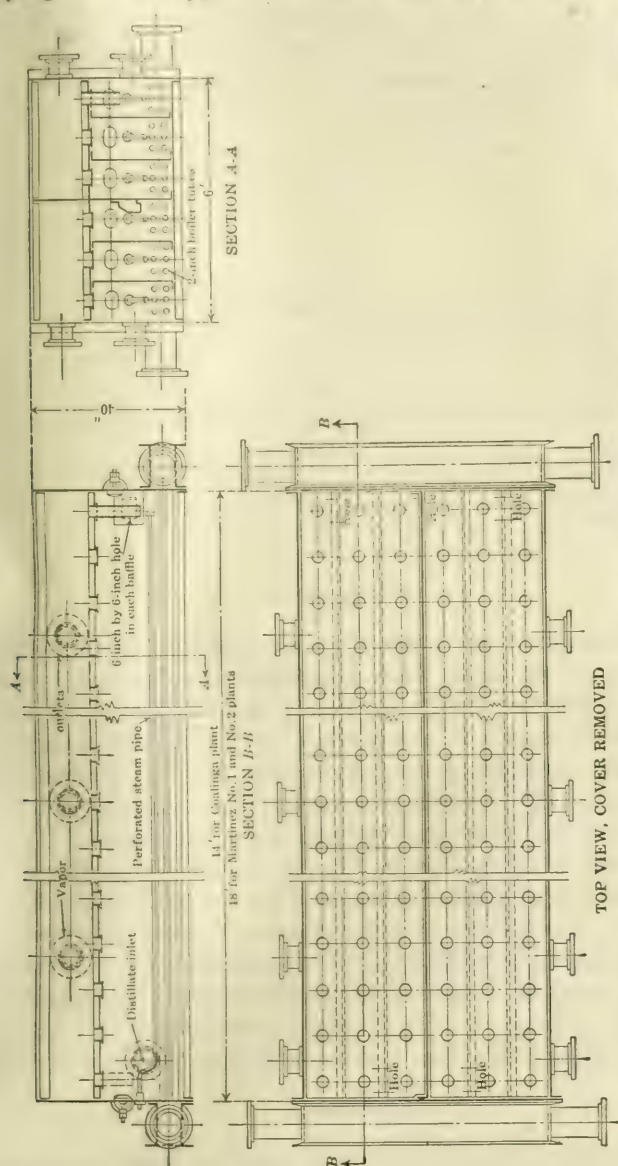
Second type of Trumble separator, used in Coalinga and Martinez plants. 14-foot tubes used with Coalinga plant, external heating surface of one unit 257.74 square feet, internal, 233.24; 18-foot tubes used with Martinez plant, external surface, 331.4 feet; internal, 300.
